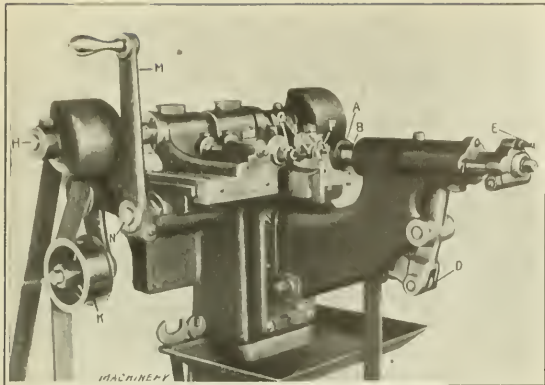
Detail of Spindle and Operating Mechanism on Duplex Milling Machine for Closing Cap
